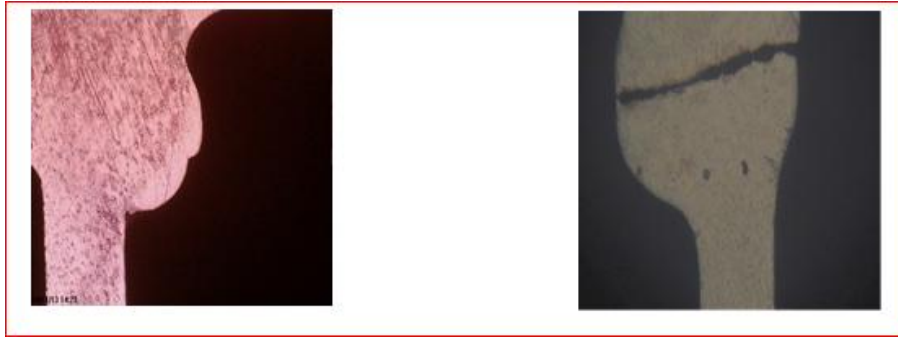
End plug weld metallographic structure. Left - healthy weld, right - heavy contaminated weld
